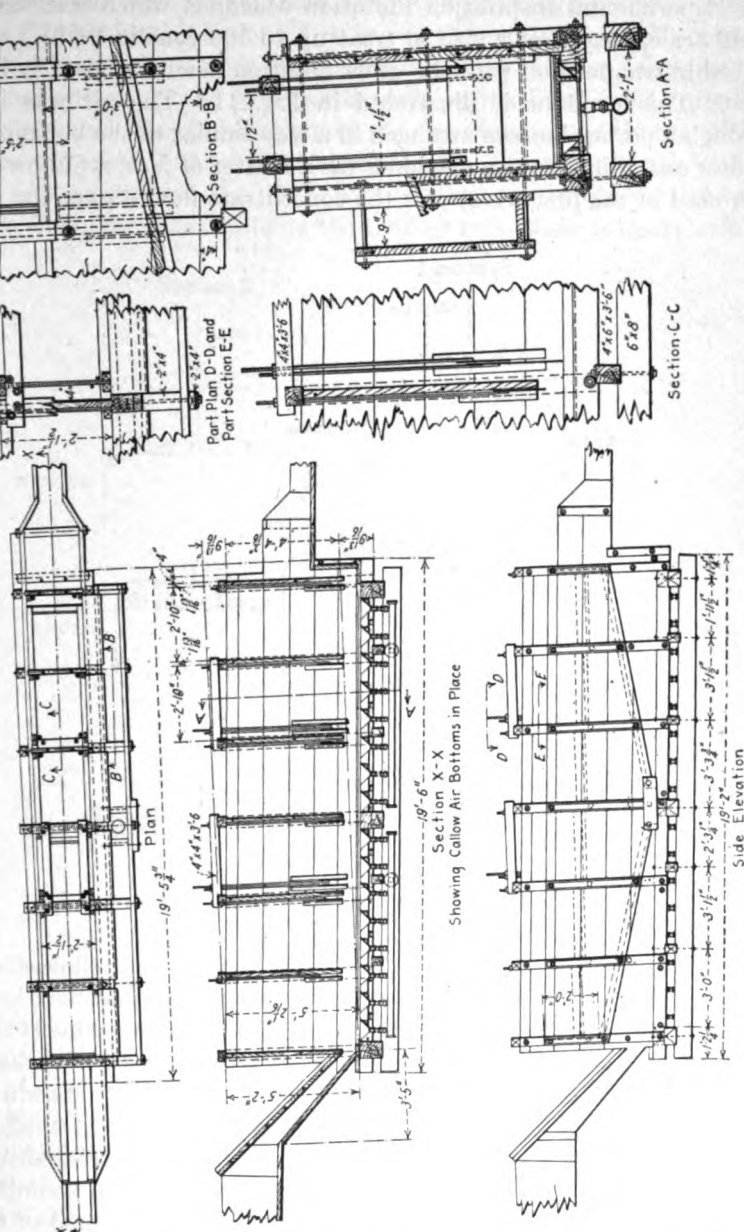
EXPERIMENTAL INSPIRATION FLOTATION MACHINE.
